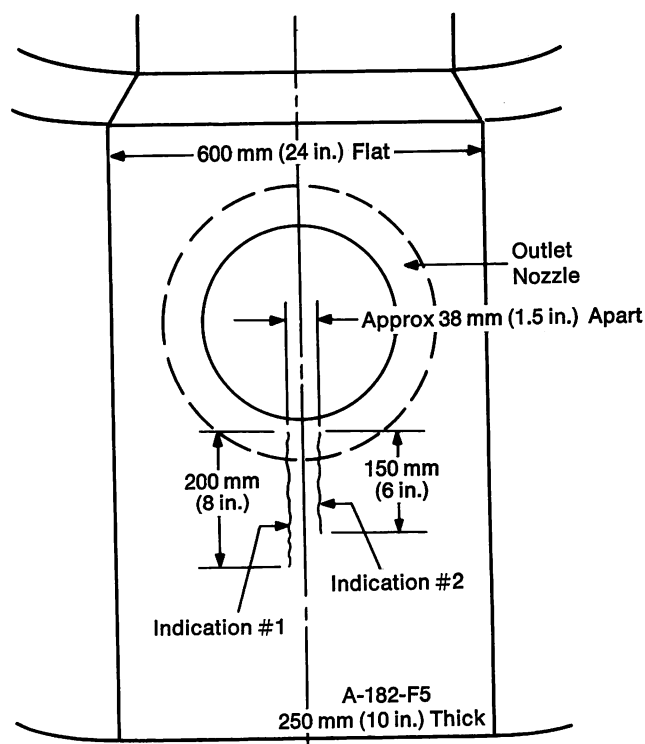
Location and size of cracks in converter. View is from inside of bottom forging.
